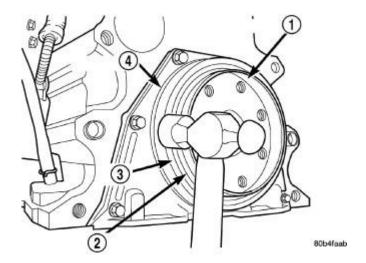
Installing Seal Using Alignment Tool & Hammer Courtesy of CHRYSLER GROUP, LLC
